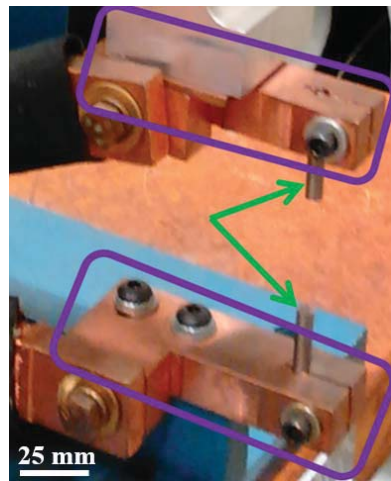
Welder Electrode Holders Shown with Purple Rectangles; and Electrodes Shown with a Green Arrow
